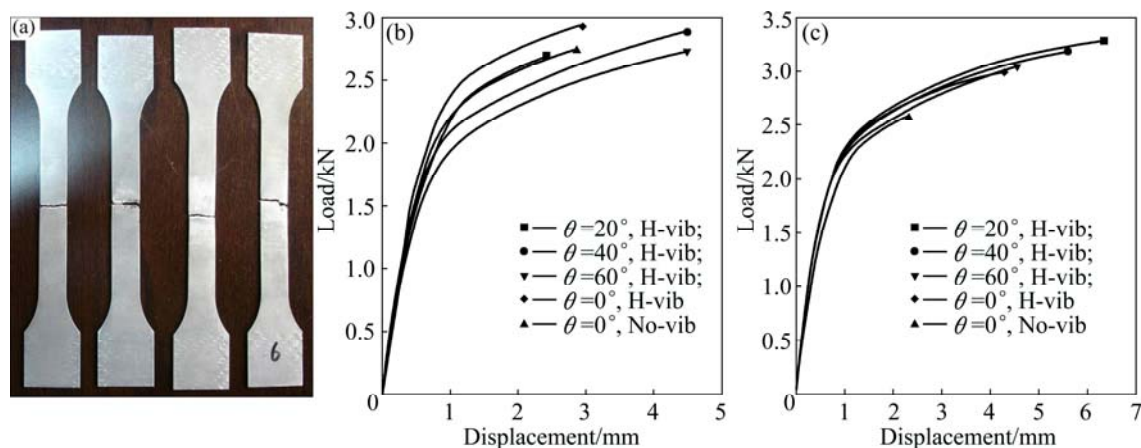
Results of tensile test of TIG weldment under different conditions, $t=1$ mm and 25%4: (a) Tensile samples; (b) H-vib; (c) V-vib
